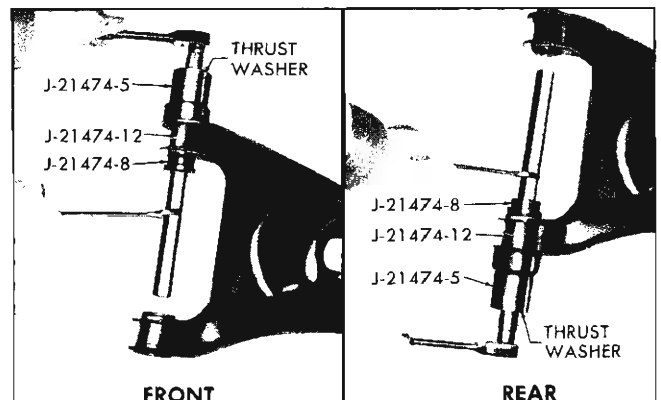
Lower Control Arm Bushing Removal—Chevelle
